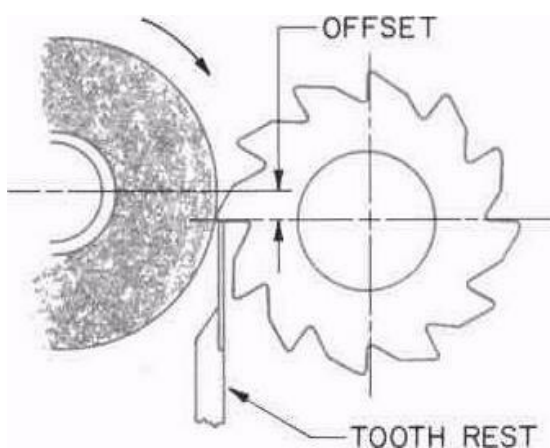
Arrangement of tooth rest, cutter, and grinding wheel for disc wheel cutter sharpening.
